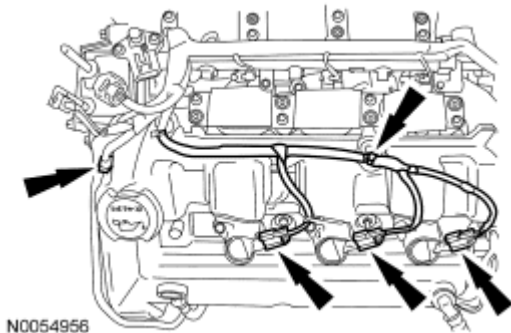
Coil-On-Plug Electrical Connectors & Wiring Retainers
